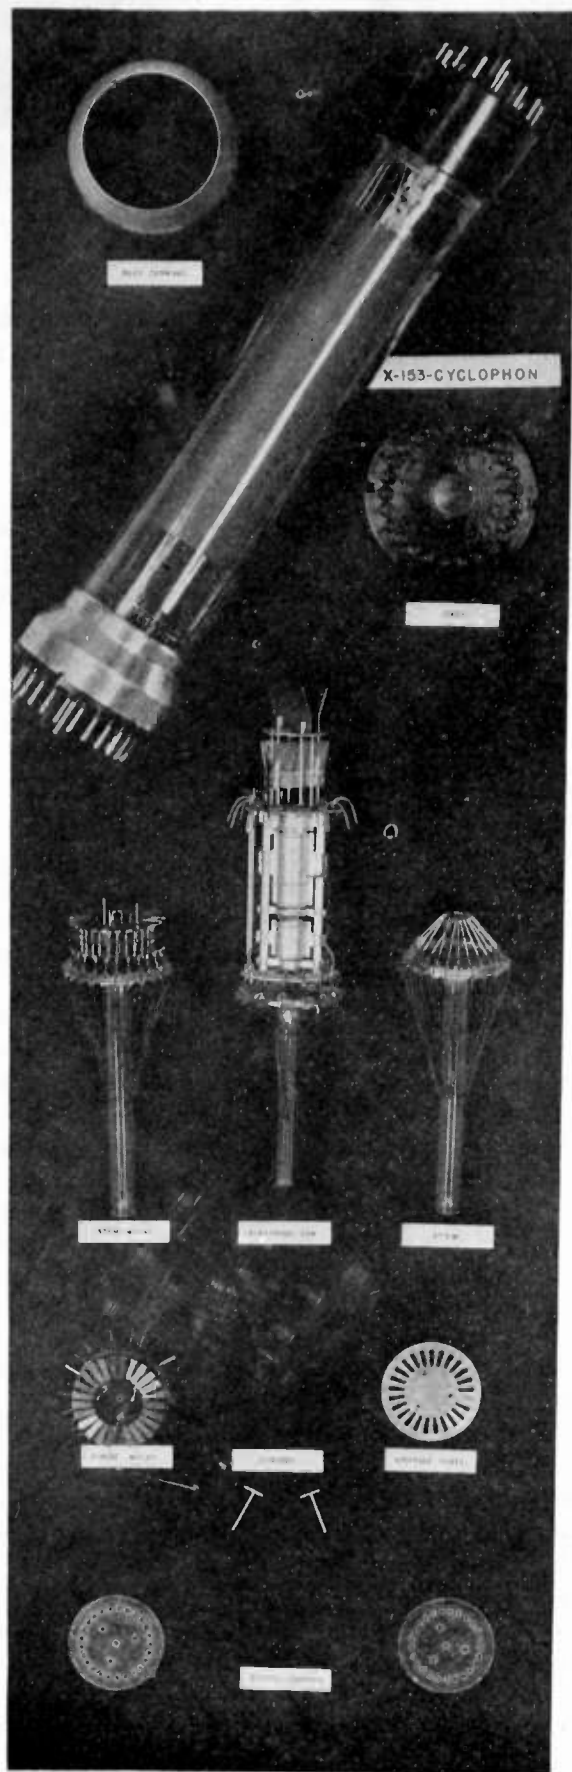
The various components of a Cyclophon tube, illustrating its form of assembly.
